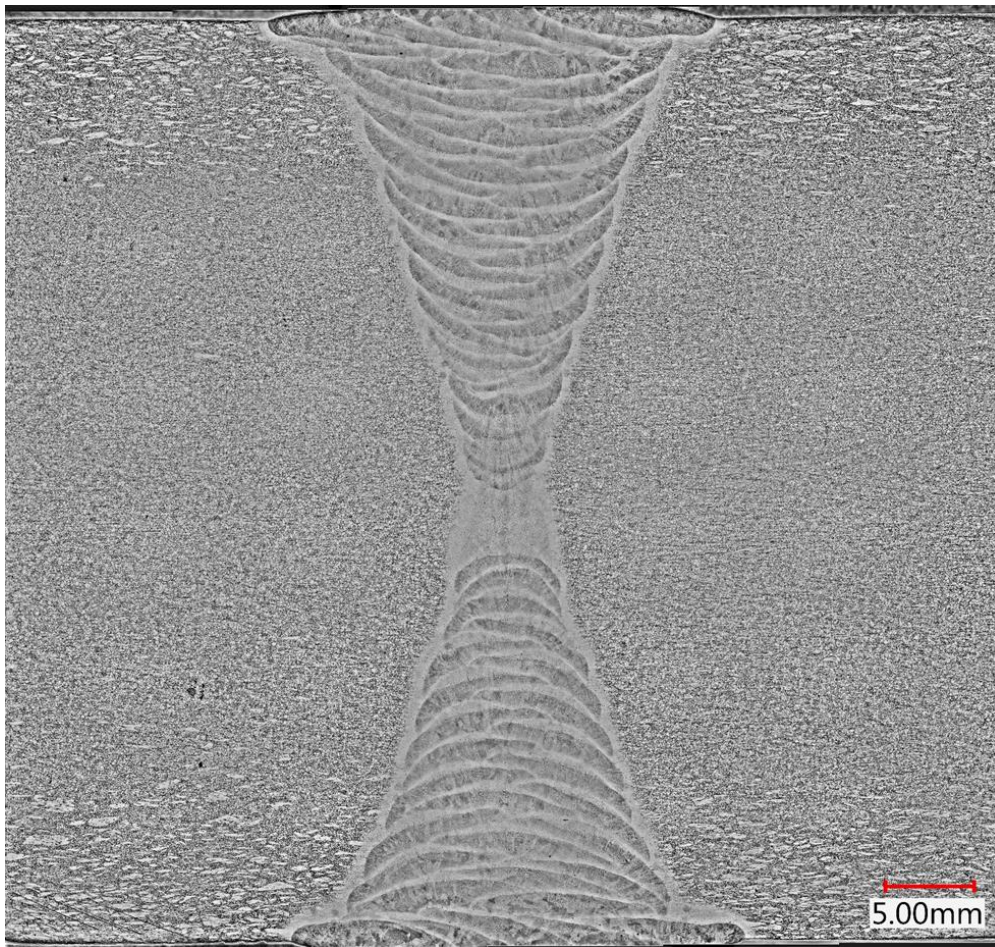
Optical image showing the cross-section of the 2"-thick production weld W11
